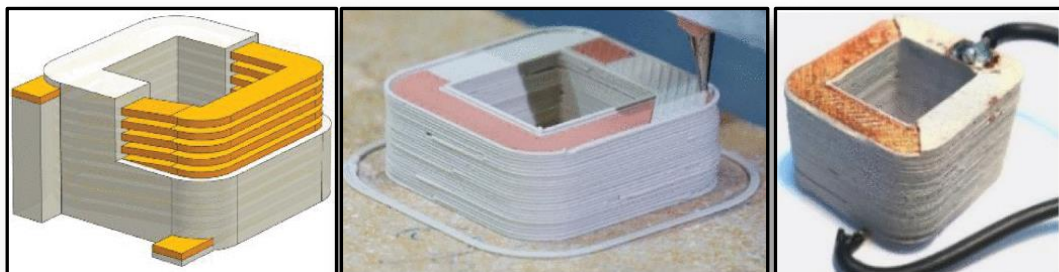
Prototype switched reluctance motor coil made using a multi-material extrusion AM process, with the CAD design (left), printed coil (centre), and post sintered (right) [113].
